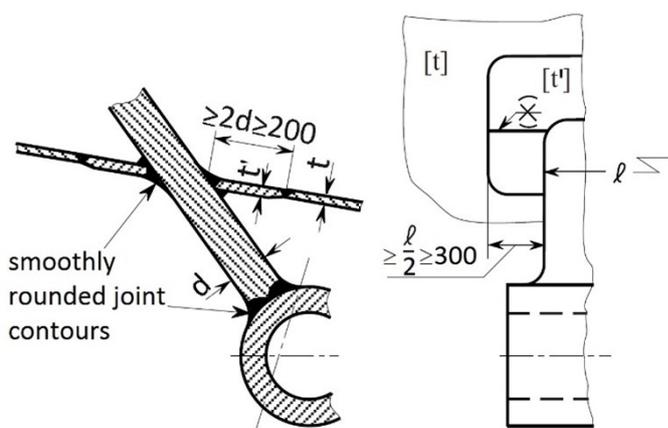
Shaft bracket with integrally cast welding flanges
